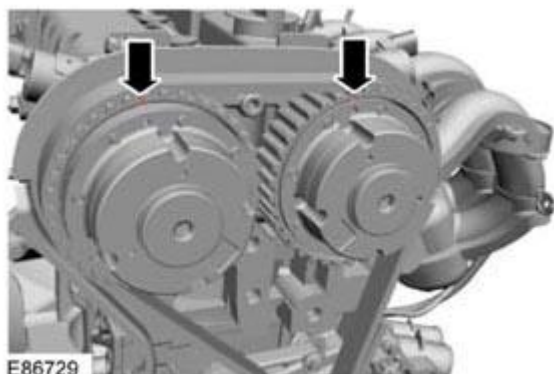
Locating Markings On Camshaft Phaser And Sprockets
